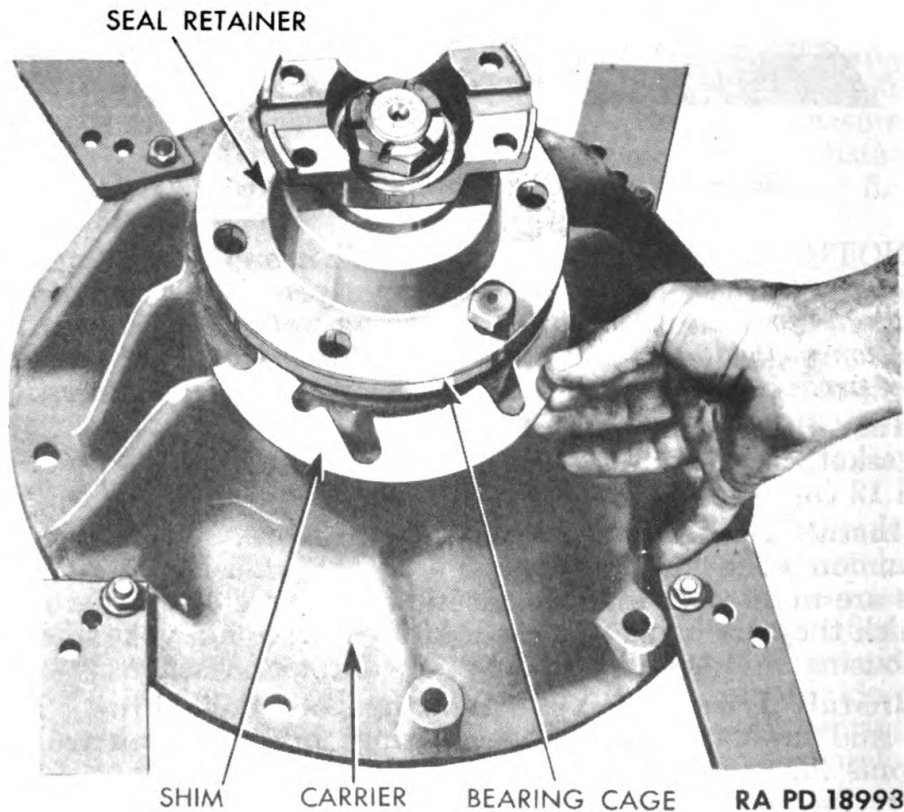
Removing Bevel Drive Pinion Adjustment Shim
